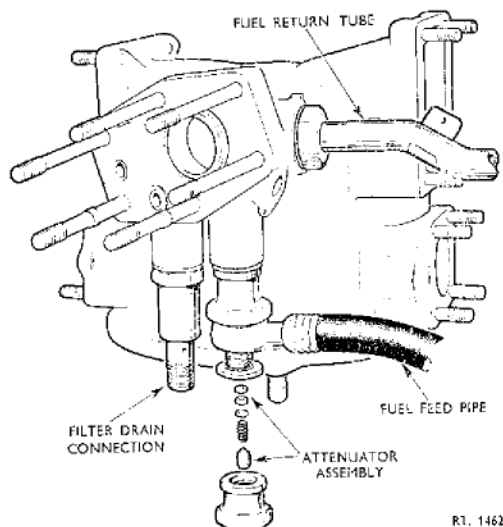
Fuel feed and return connections to B.P.C. (F.C.U. type BA.70573)
